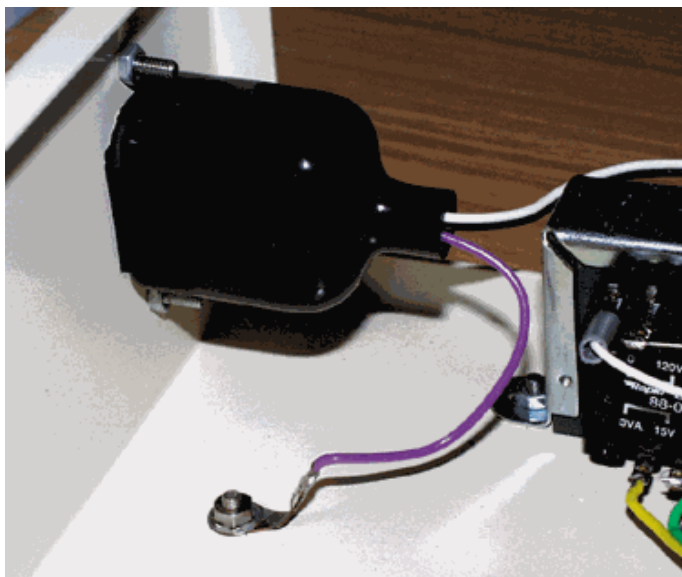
A solder tag provides an Earthing point on the base of the metal case. The IEC inlet is comprehensively insulated by a matching insulating "boot".
